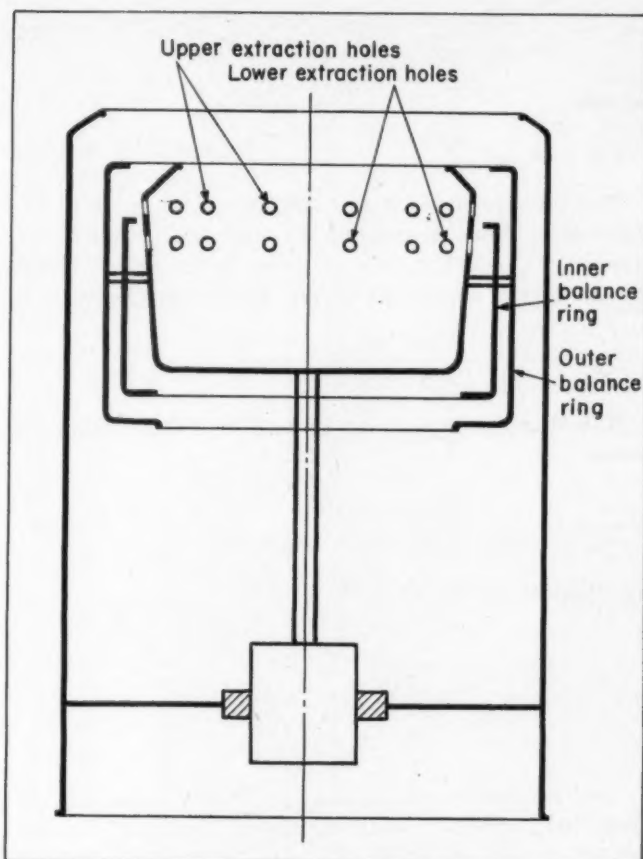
Modified Leblanc balancer with two balance rings. Liquid from upper extraction holes passes into outer ring, from lower holes into inner ring
